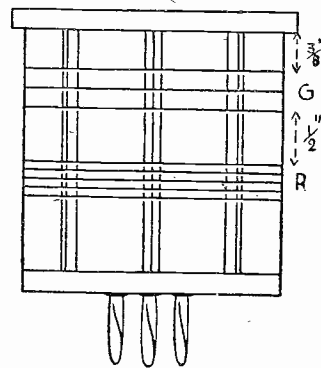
A coil wound for 12.5m. to 26.5m. G=3 turns 26 D.C.C. R=5 turns 26 D.C.C. G turns spaced 3/16 in. R turns spaced 3/32 in.
